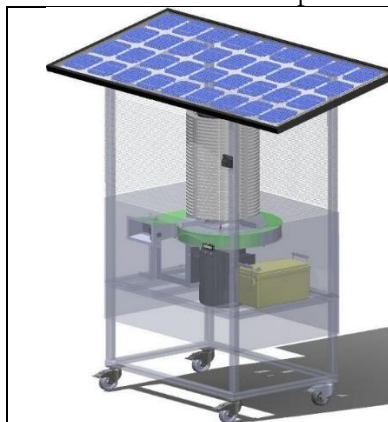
SolidWorks CAD model of the complete air purifier assembly
